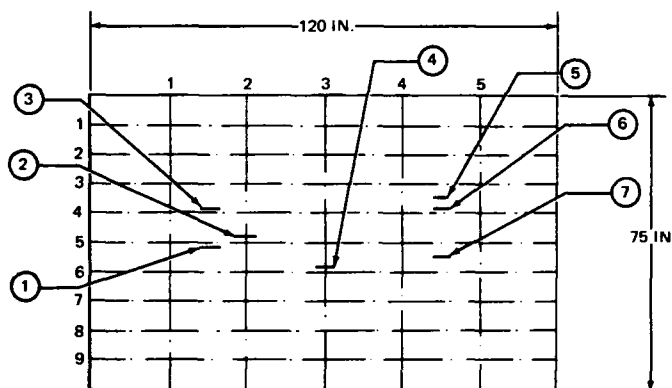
CRACK LOCATIONS FOR TESTS ON 120-IN. WIDE PANELS
